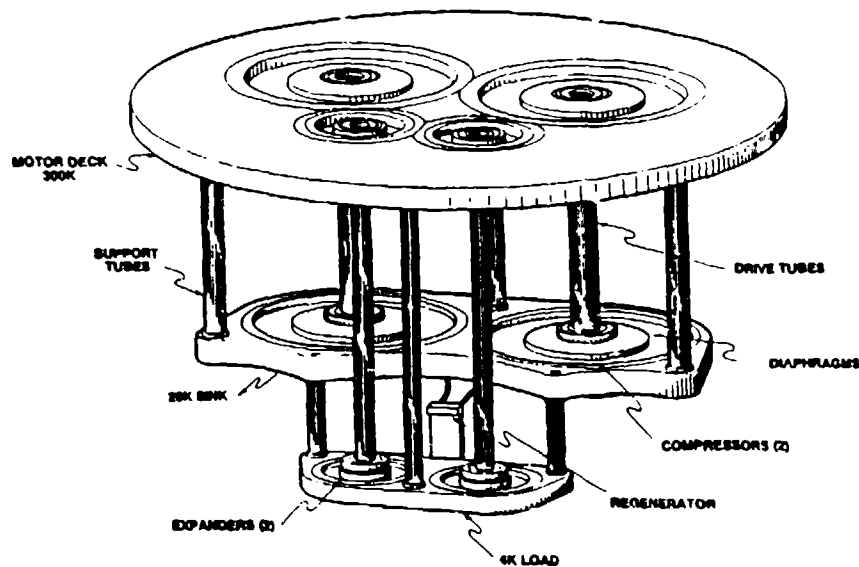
200 mW 4-20 K COOLER ASSEMBLY
